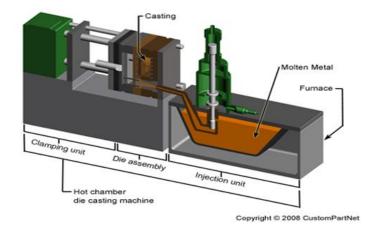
Hot chamber die casting machine. (Ali Abbas Khan 2023)
